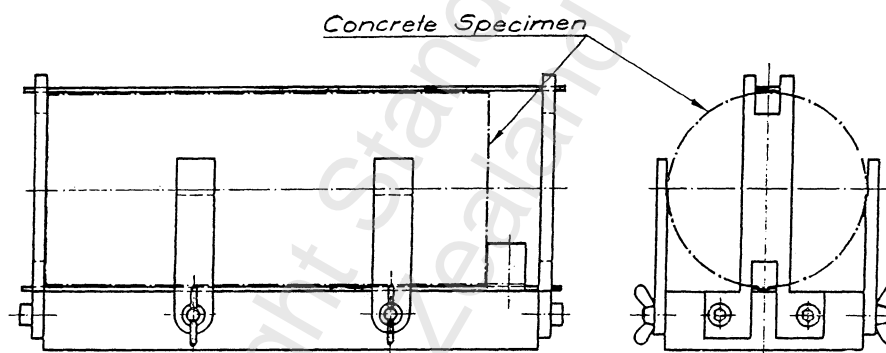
JIG FOR HOLDING SPLITTING TENSILE STRENGTH SPECIMEN
